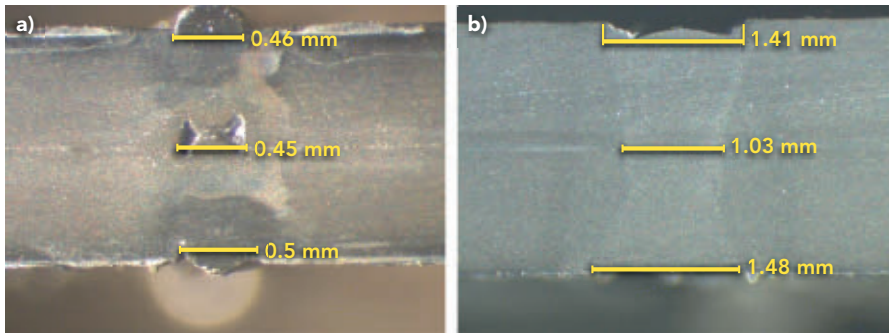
Cross-sections show the weld seam for 1.25-mm-thick zinc-coated steel processed using a fiber laser without a gap between the sheet and at a feed rate of 3.3 m/min, where conventional laser focusing creates a seam with voids (a) and the FL-ARM creates a weld seam with excellent uniformity and no porosity (b).
